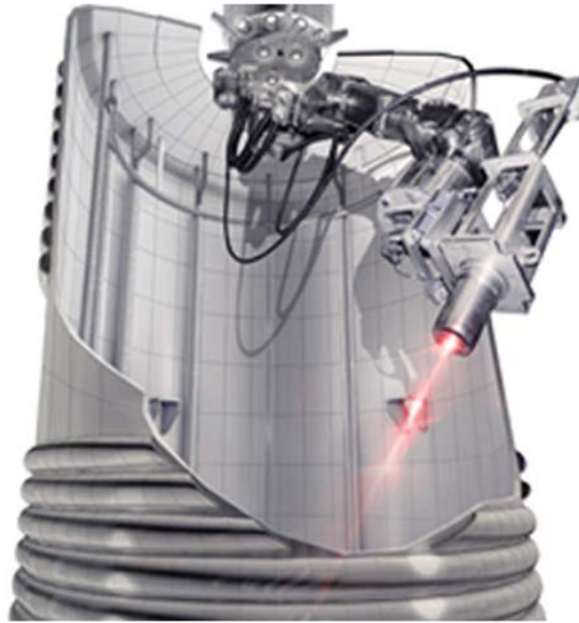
Marcoule remote controlled laser cutting system (courtesy of CEA).
